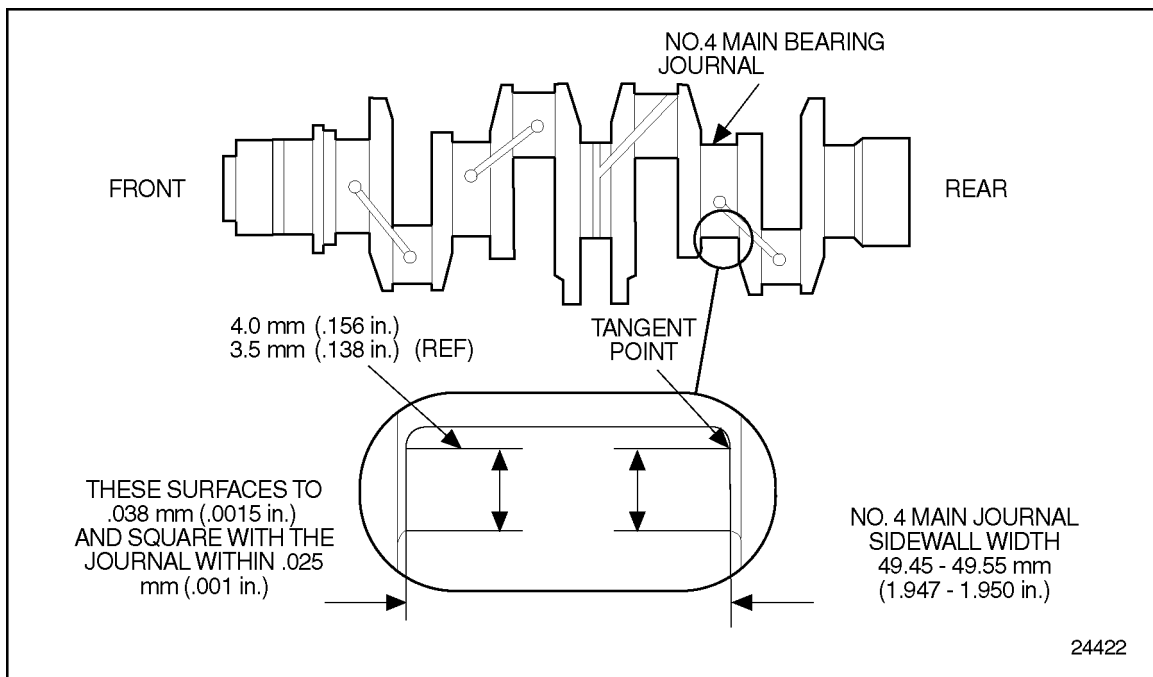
No. 4 Main Journal Thrust Wall Dimensions
